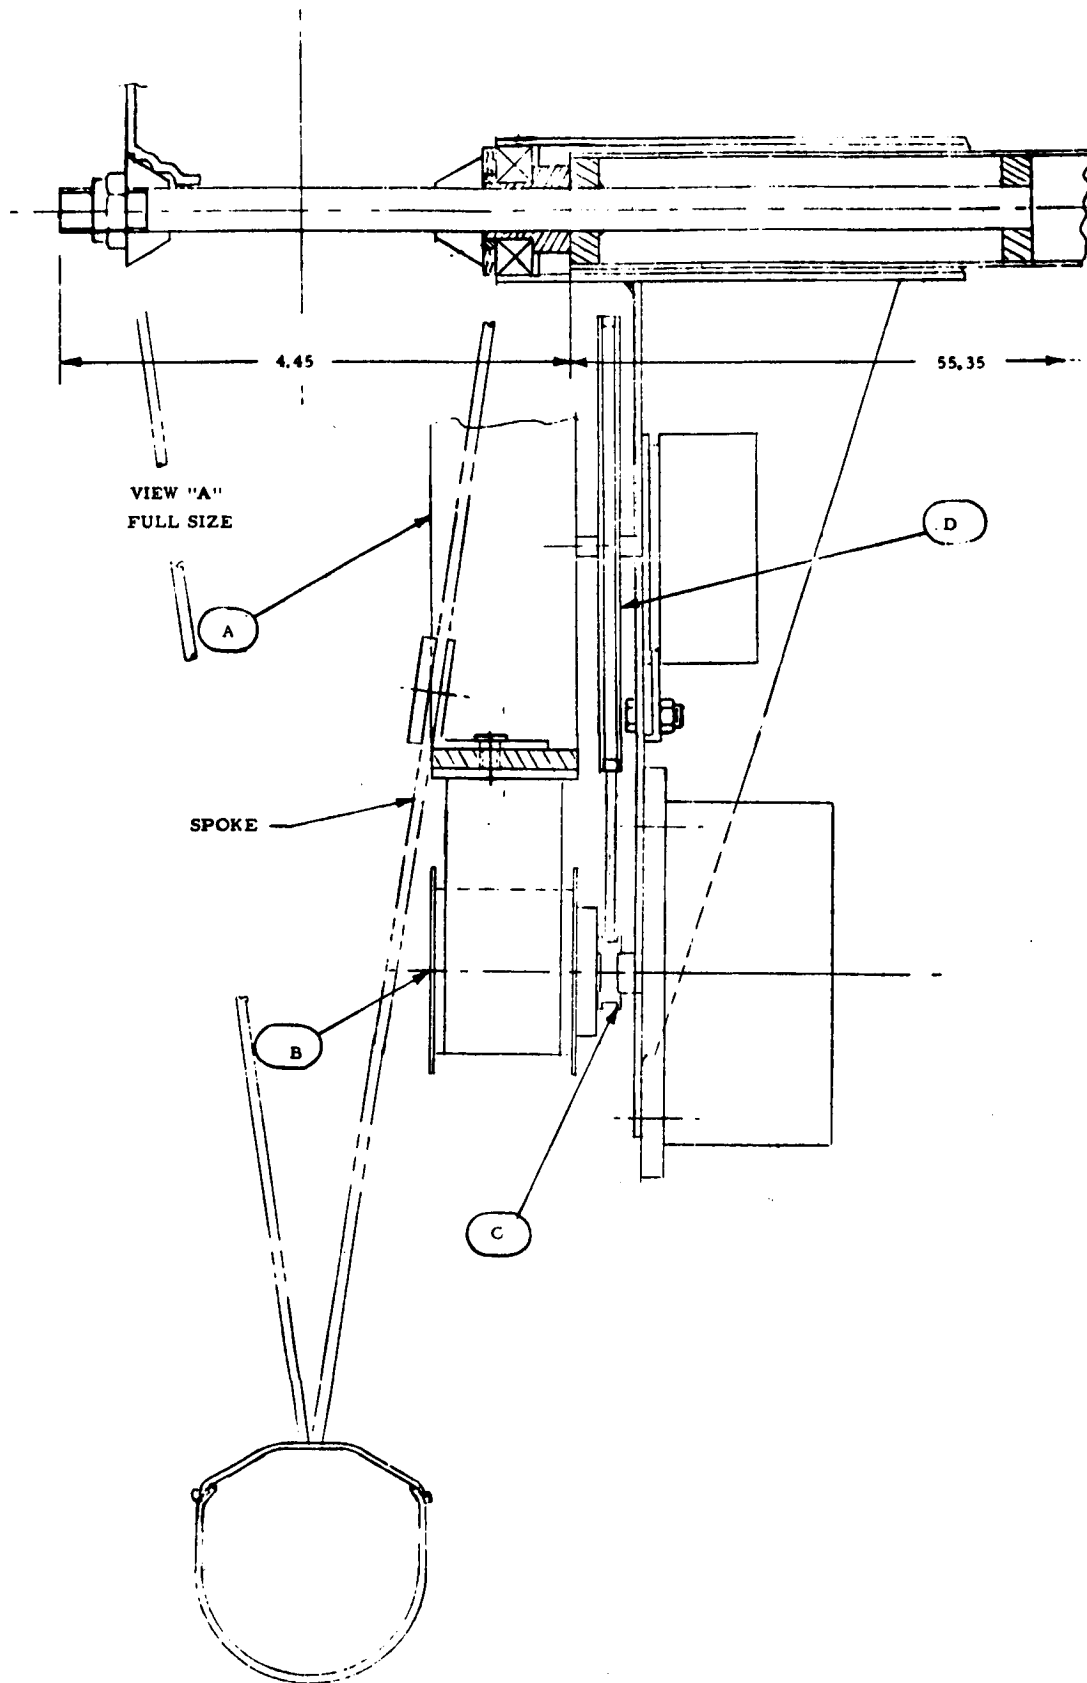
ELMS Trailer Gear Train Assembly
